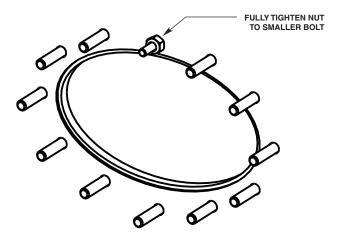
Mounting Plate is Secured by Nut on Smaller Bolt
